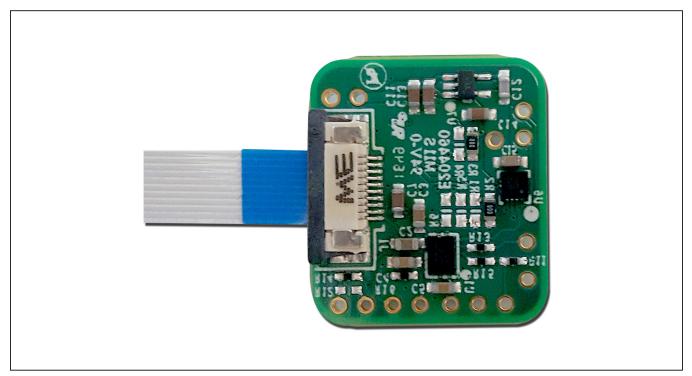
MAX30110 EV Kit—Hardware Setup (Sensor PCB 2 – Bottom View)
